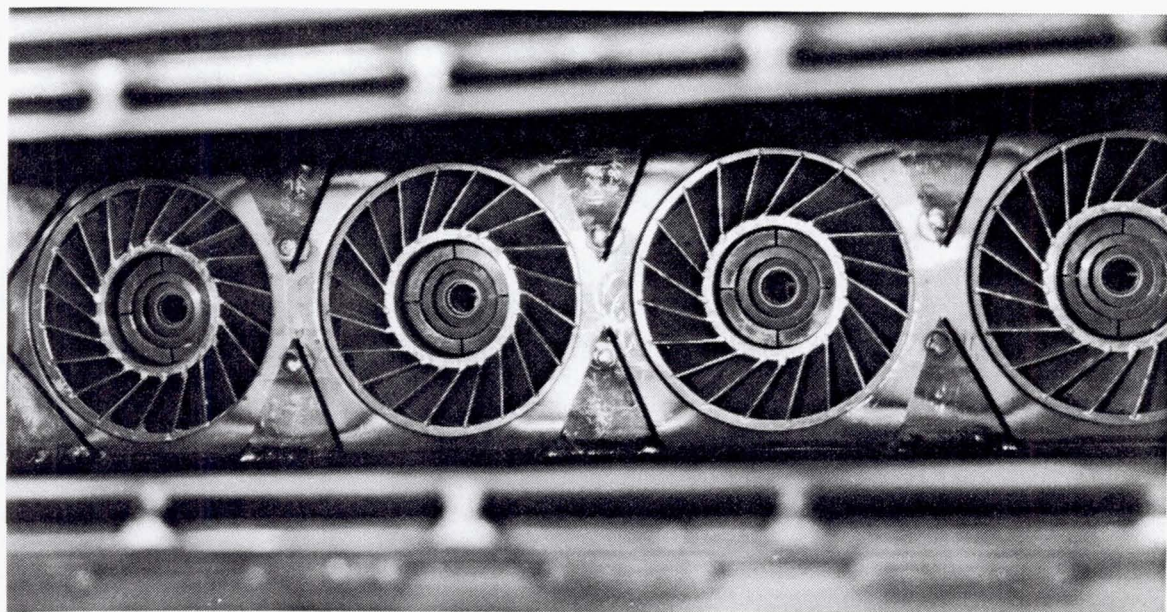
Bulkhead of Variable Geometry Combustor Showing Fuel Injectors, Swirlers and Bulkhead Heatshields.
